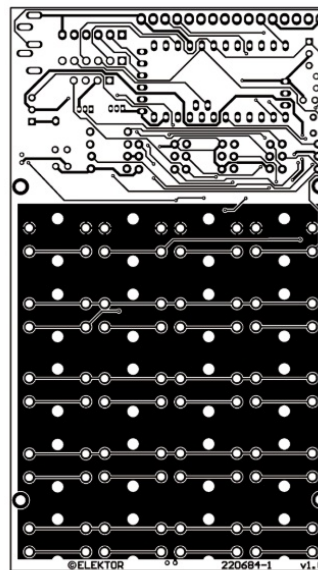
MultiCalculator PCB copper bottom (PCB 220684-1 v1.0).
